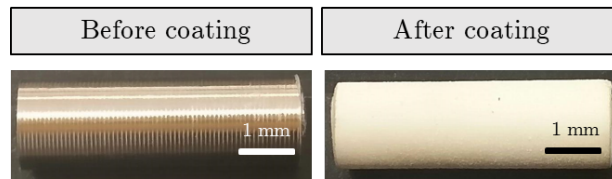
On the left: Sample B after machining and on the right) sample B after coating and sintering.
